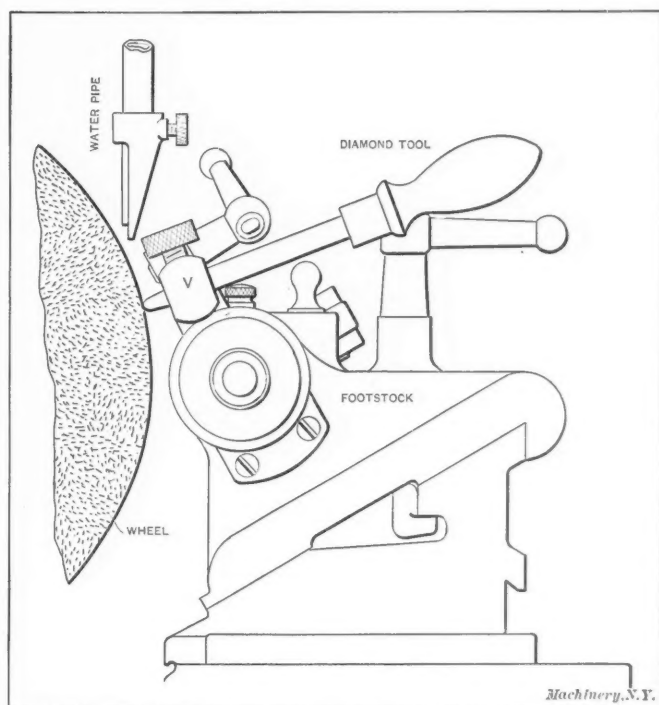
The Way the Diamond Tool should be mounted for Truing the Wheel
